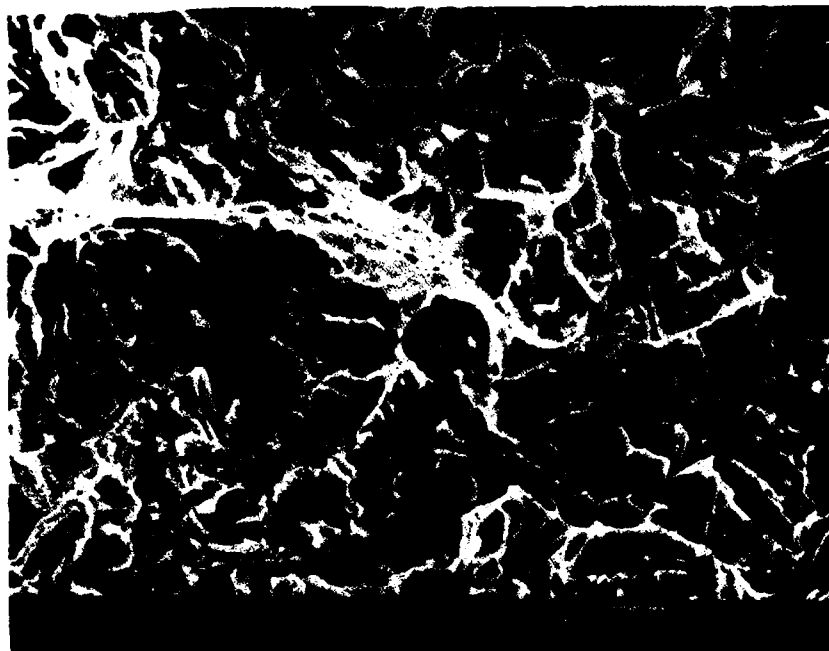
Scanning Electron Fractographs of Cleavage Fracture
